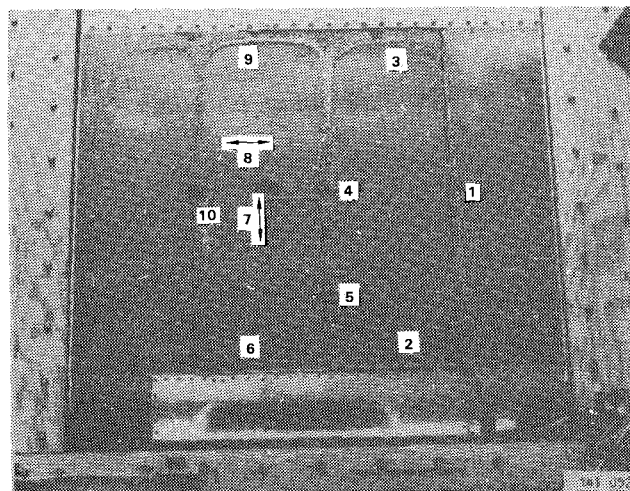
Aileron assembly in test frame showing surface strain gage locations.
